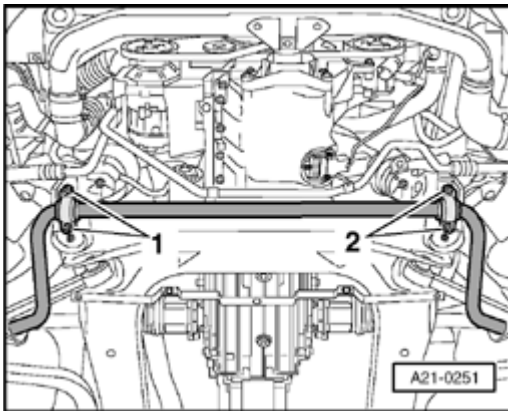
Removing Bolts For Left And Right Stabilizer Bar Mount
